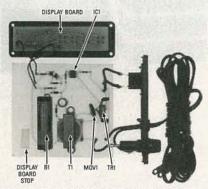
THE COMPLETE TIMER CIRCUIT appears as shown here. Trim the PC board so that it fits into the case properly, and insert a sheet of insulating paper between the board and the bottom of the case.
